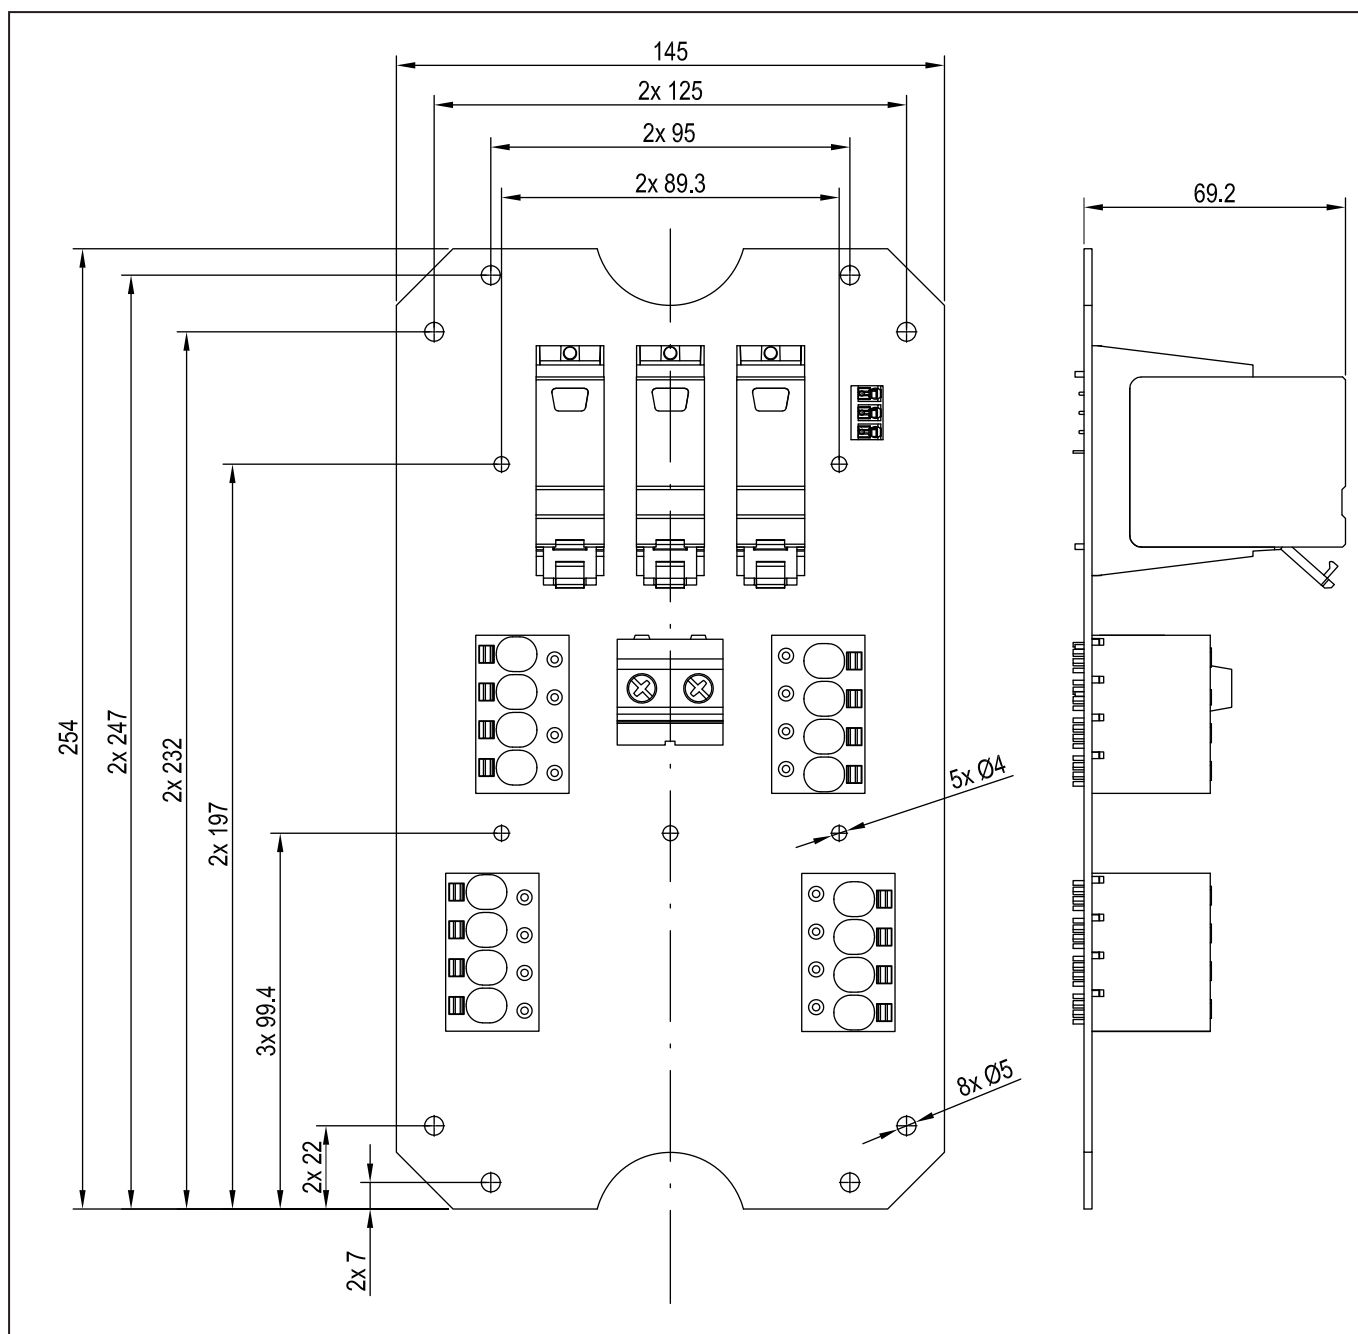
PCBA PV SCB 1 KV 3I3O SPD T2 NF (2672190000)
